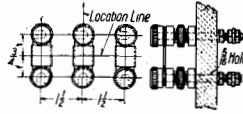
CURRENT COIL TERMINALS FOR SLATE PANEL MOUNTING
